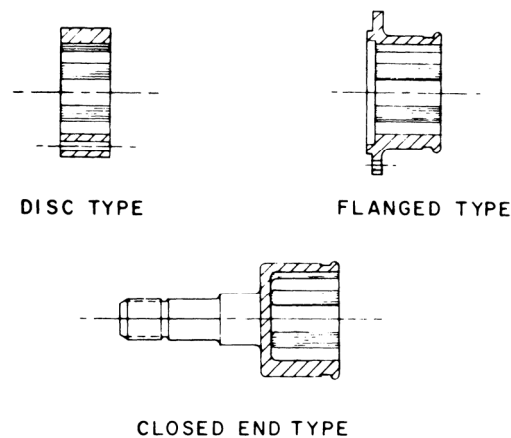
TYPICAL DOUBLE OFFSET JOINT OUTER RACE CONSTRUCTIONS
